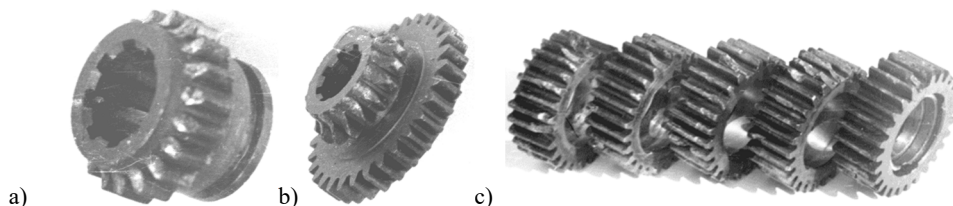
Destruction of gear teeth of the gearbox: a) reverse gear stages; b) II gears; c) satellites.
